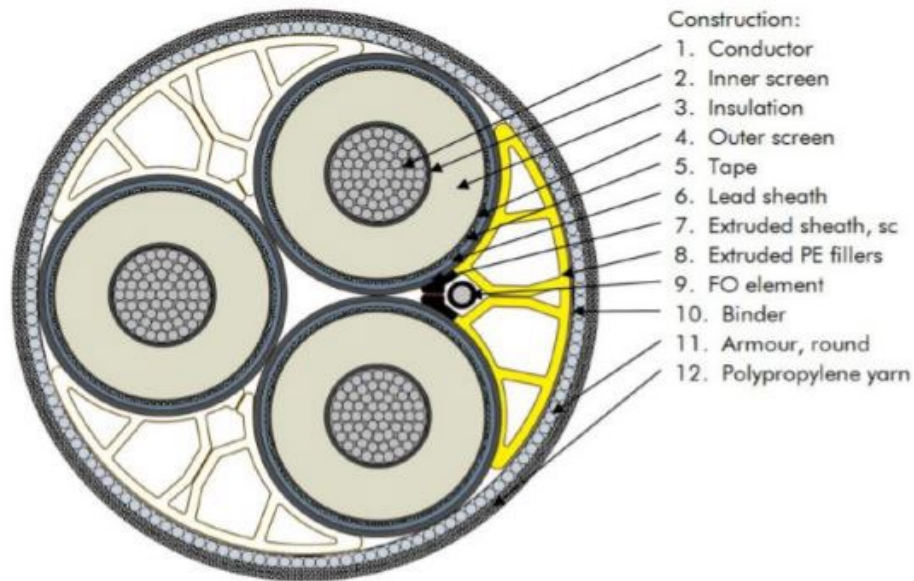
230 kV Cable Cross Section (Source: Nexans)
